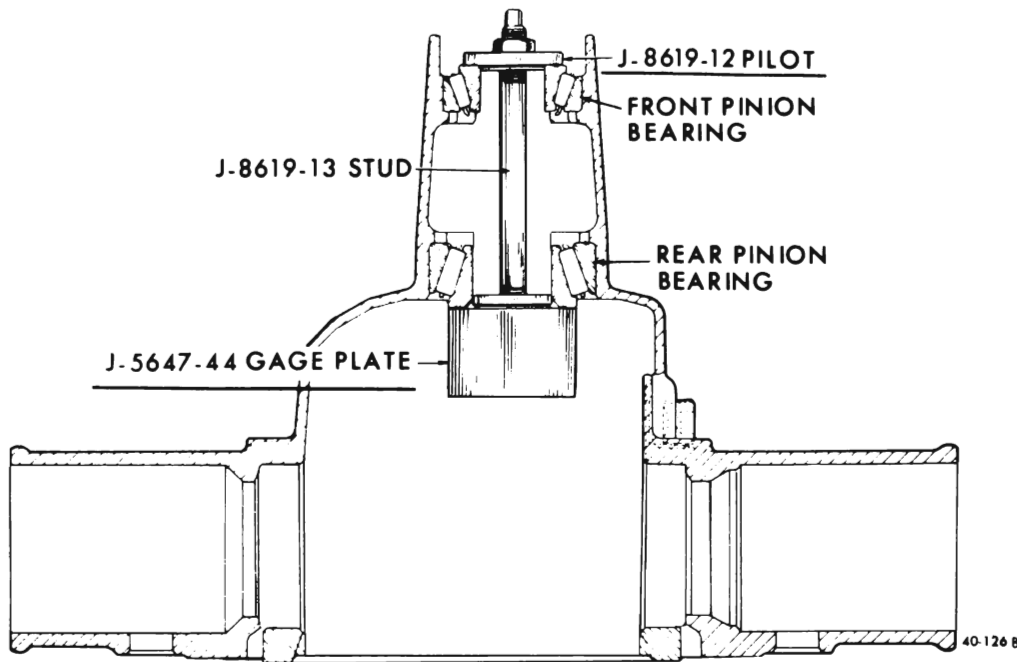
Pinion Gage Plate Installed in Carrier
